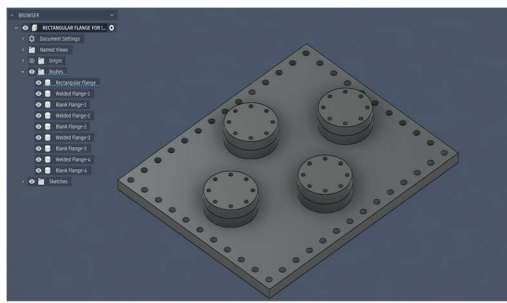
19 mm Rectangular Vacuum Vessel Flange with CF-63 Flanges
